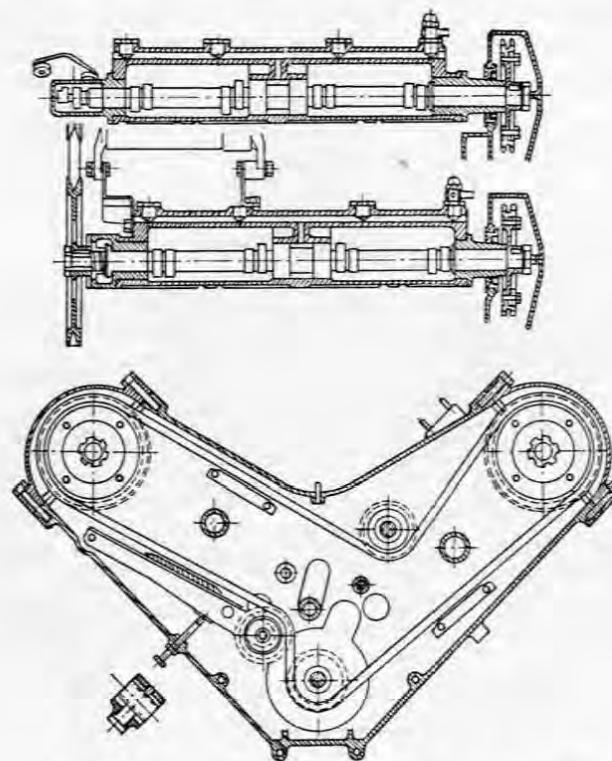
Drive of the valve gear of the Tatra 87 engine.
